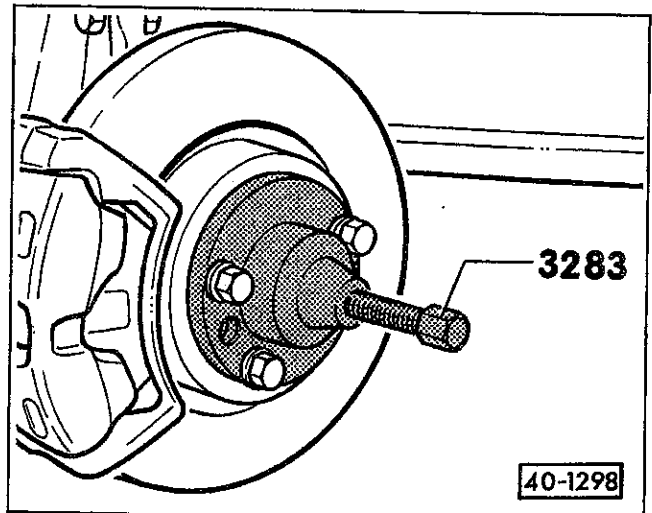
Axle shaft being pressed out of wheel hub. Number indicates VW special tool.
